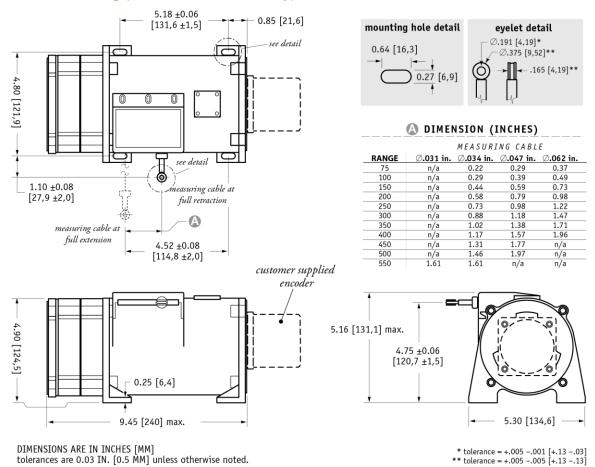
Outline Drawing (36 oz. cable tension only)
